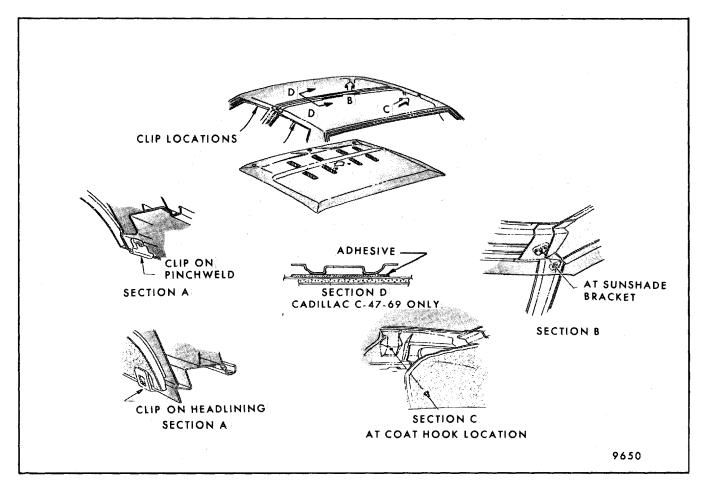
Formed Headlining Assembly - B,C Styles Shown
